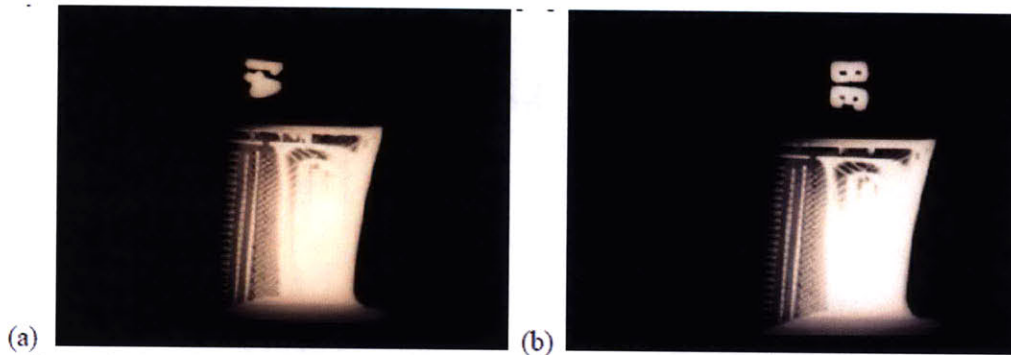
(a-b) Traditional film radiographs of two blades with weld drop through defects [190].
